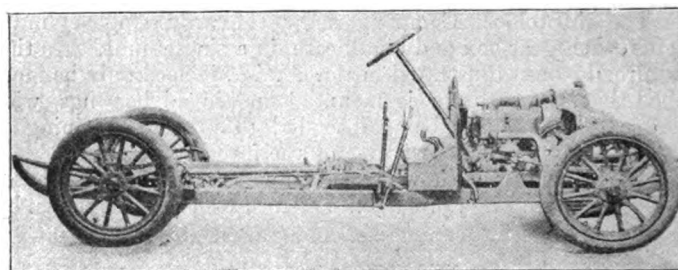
Chassis of "Stabilia" Car, in which the frame and the whole of the engine and driving gear are directly supported on the springs.
